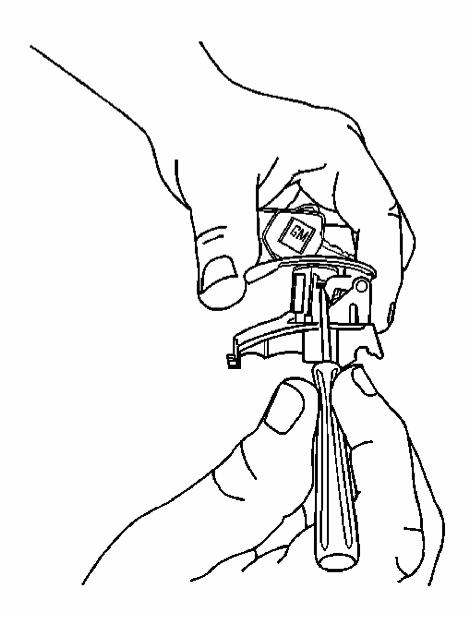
Depressing Retainer Tumbler Through Poke Hole Courtesy of GENERAL MOTORS CORP.
